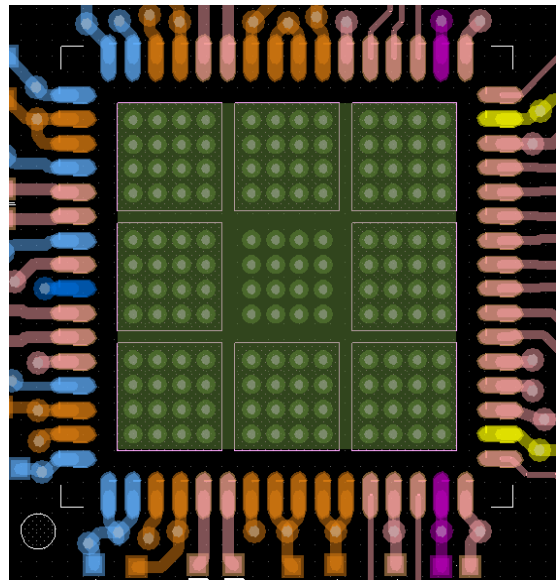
Recommended PCB Layout of Exposed Pad for the [AD6674](#)
